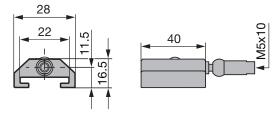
Installation dimensions of BTL5-T-2814-1S magnet
